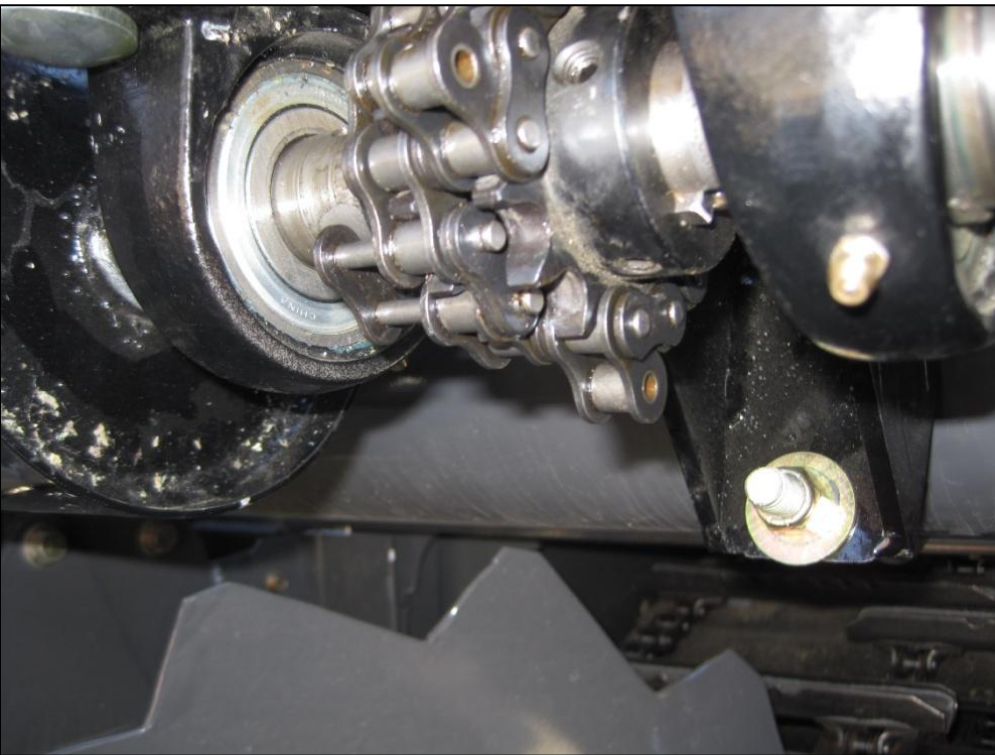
INSTALL THE CHAIN COUPLER ONTO THE SPROCKETS.
